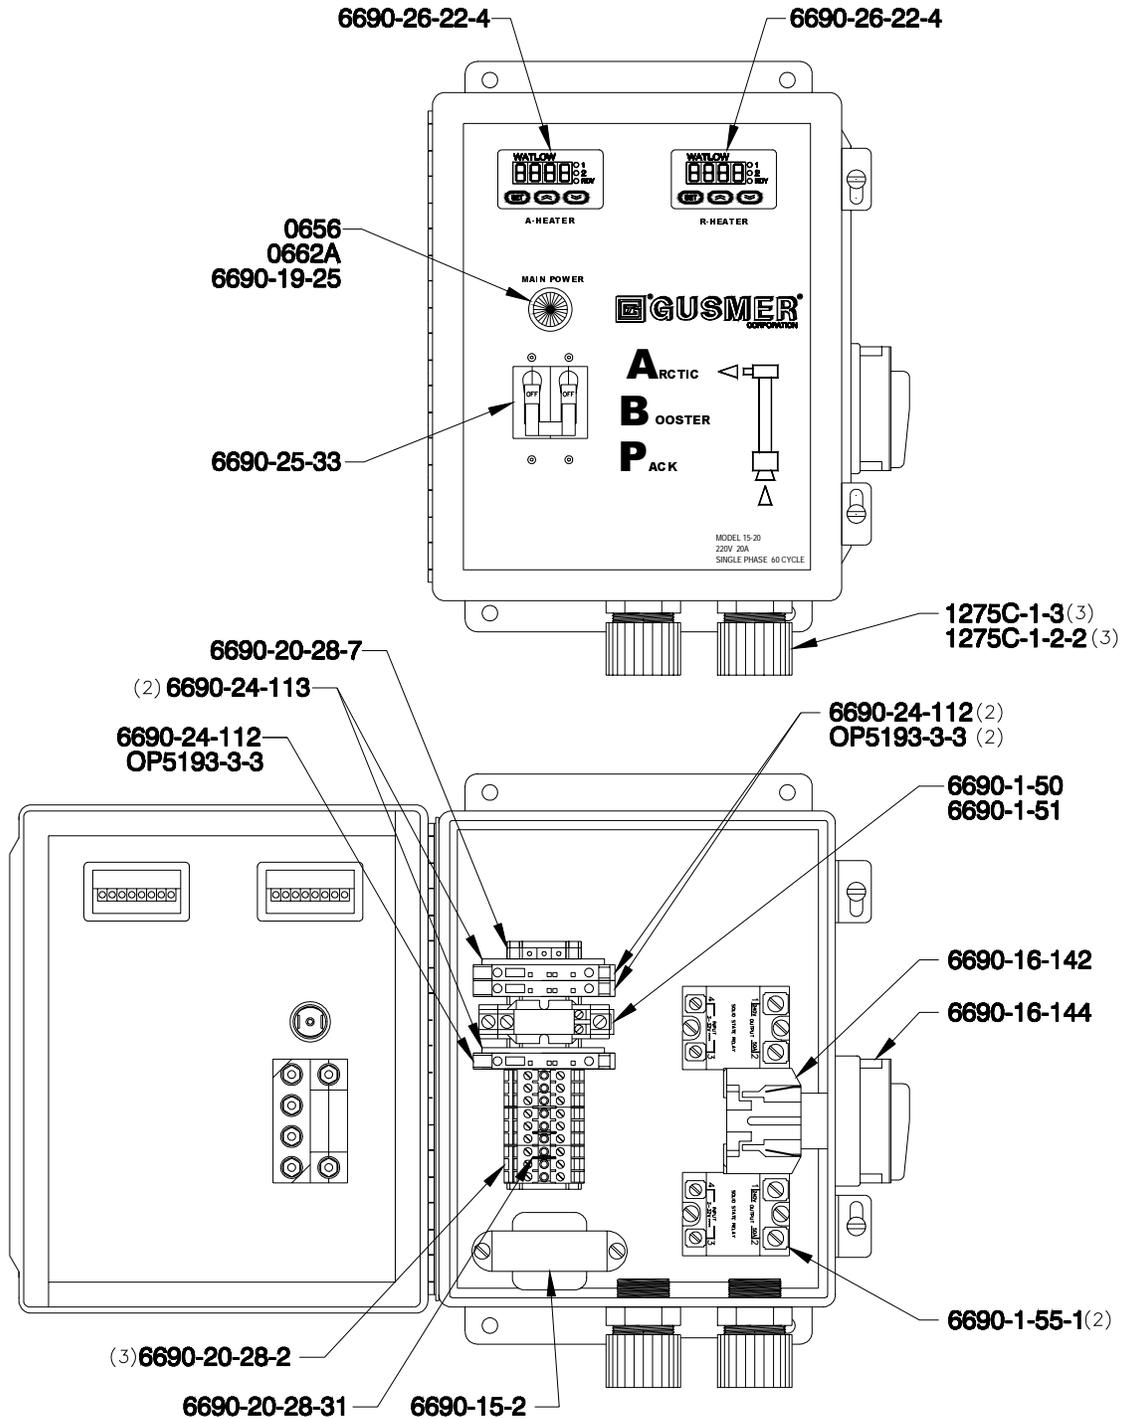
Electrical Console, (Part No. OP19350-2-220), Exploded View
